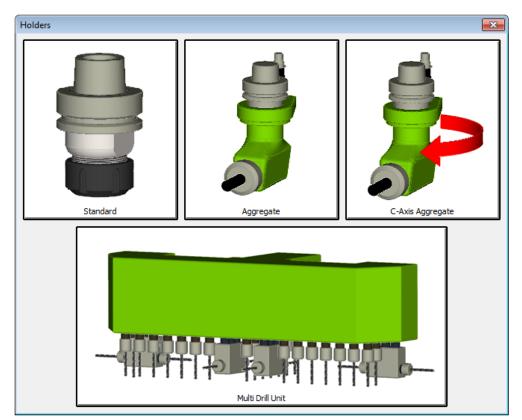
Tool Holder Selection options for Defining New Holder in Router only
